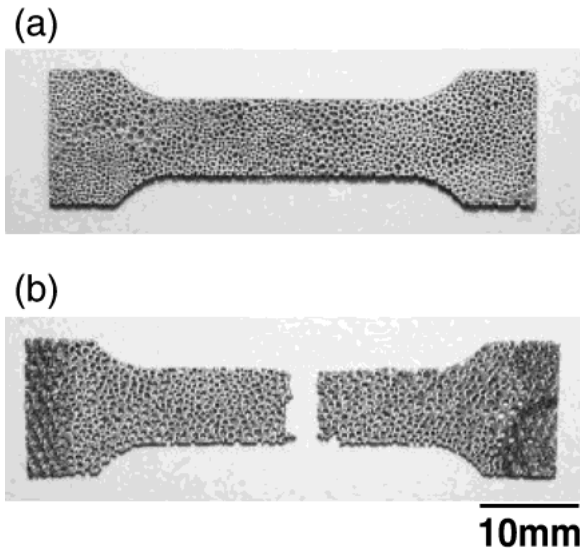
A picture of specimen of porous stainless steel for a tensile test: (a) before a tensile test and (b) after fracture by a tensile test.
